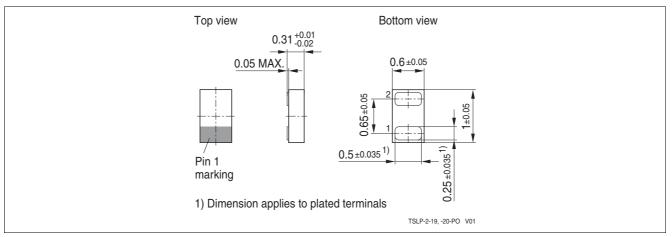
TSLP-2-20 Package outline (dimension in mm)
